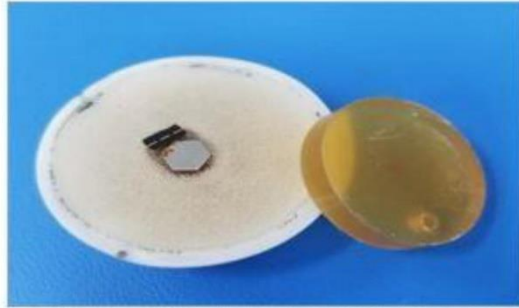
Specimens mounted in both epoxy and acrylic for cross-section processing.
